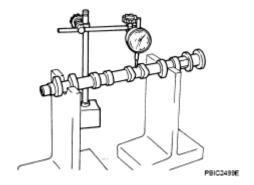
Measuring Camshaft Runout On Dial Indicator
